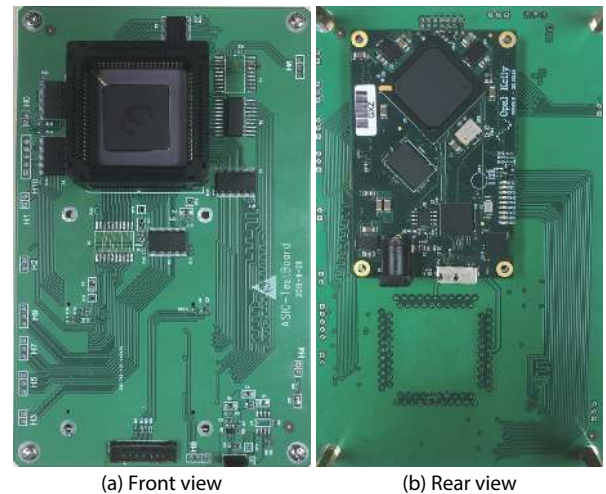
(Color online) Views of the testing board. The front view contains testing IC under CLCC84 packaging and socket. The rear view contains FPGA for interfacing IC with the host machine.
